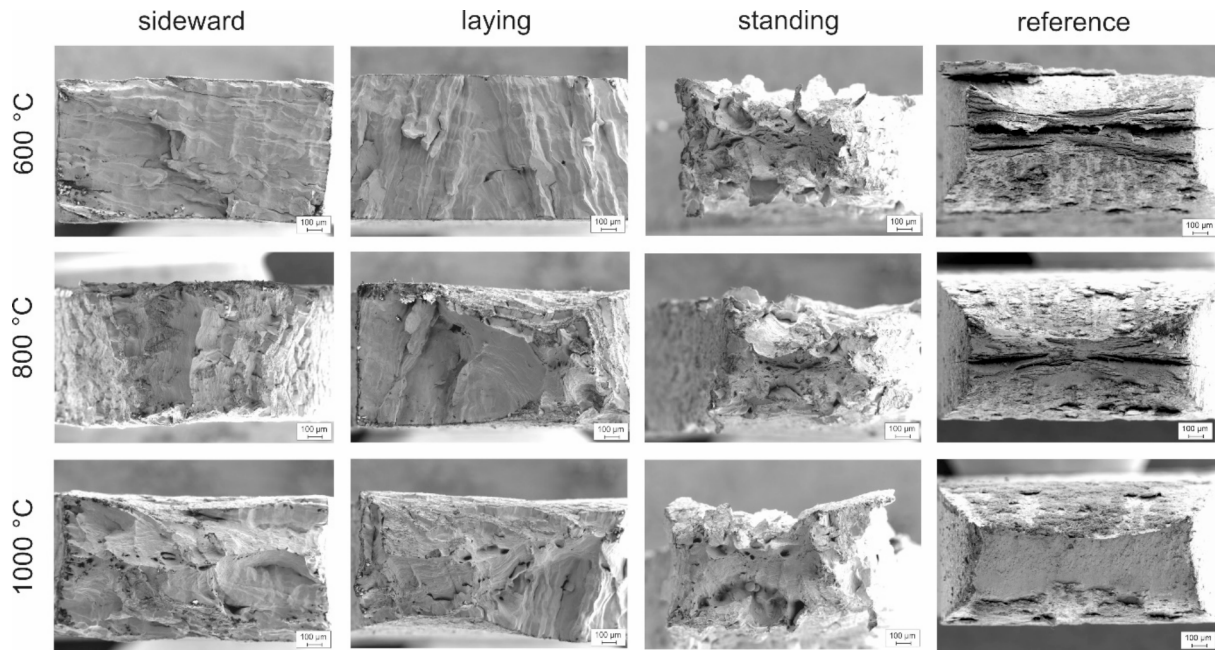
SEM images of the W-EBM specimens (fracture surface) after tensile testing. Reference. Plansee tungsten plate tested in rolling direction.
